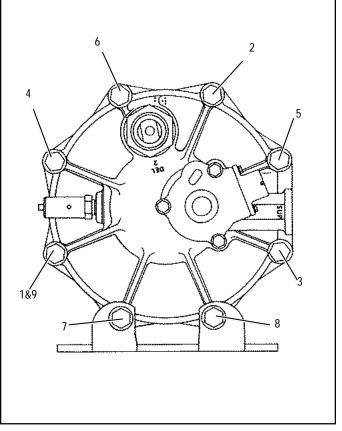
END COVER TO HOUSING TORQUE PATTERN
